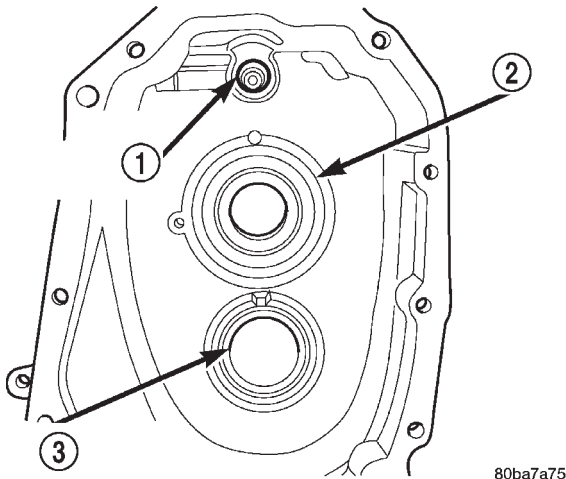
SEATING SHIFT SOCKET ROLL PIN
